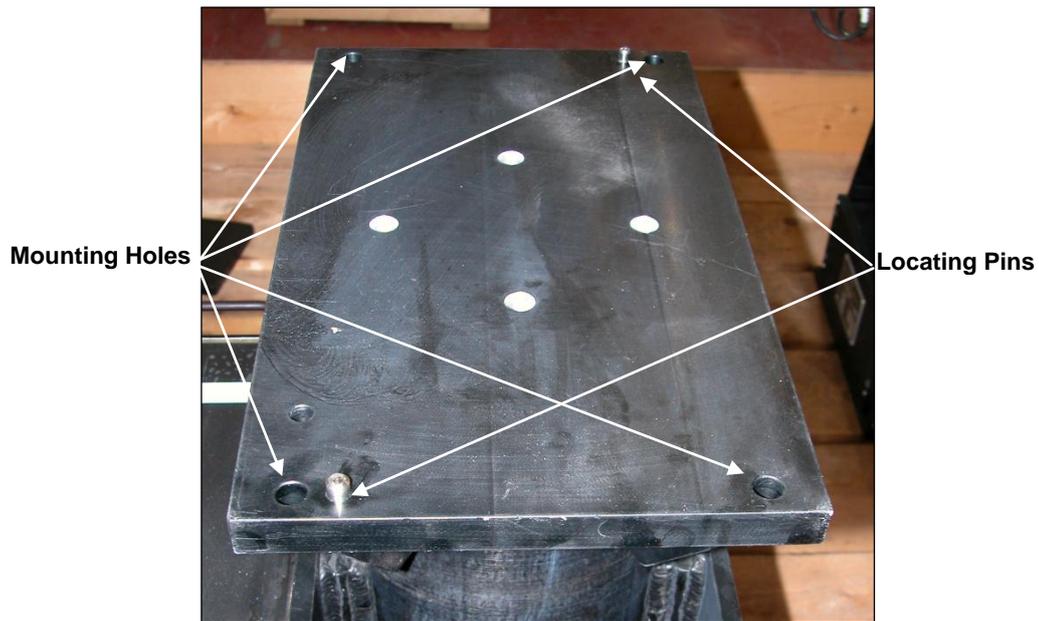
Pedestal's Upper Mounting Plate, Mounting Holes and Locating Pins
